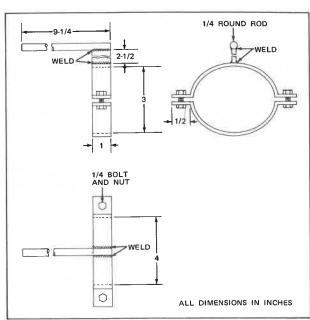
INDICATOR HOLDING FIXTURE FOR ALIGNING EQUIPMENT BLOWER WITH POWER TAKE-OFF SHAFT.
